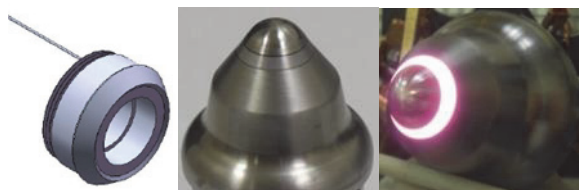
Design drawing of the conventional emitter (left), manufactured cathode (middle) and heated emitter (right).
